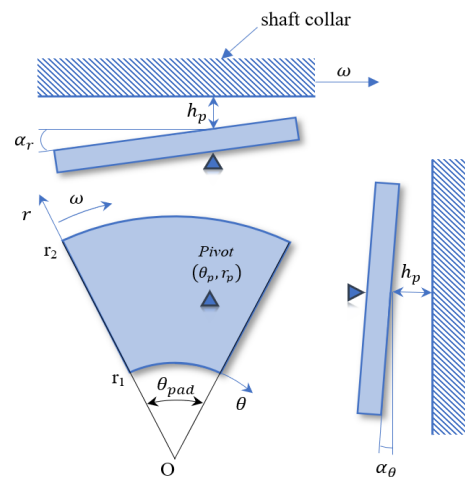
Diagram of a pivot tilting pad thrust bearing.
